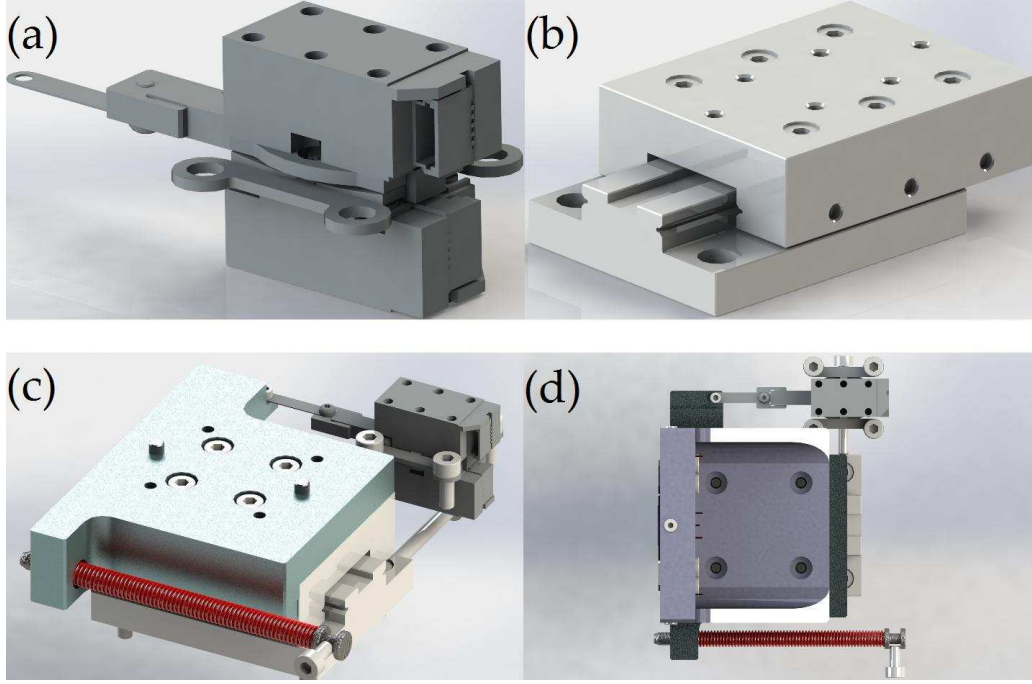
Scanner movement assembly: (a) PiezoLegs motor; (b) Sliding plate; (c) the base of the scanner with the motor, the plate and the pre-loaded spring; (d) top view, with the scanner on top of the movement stage.
